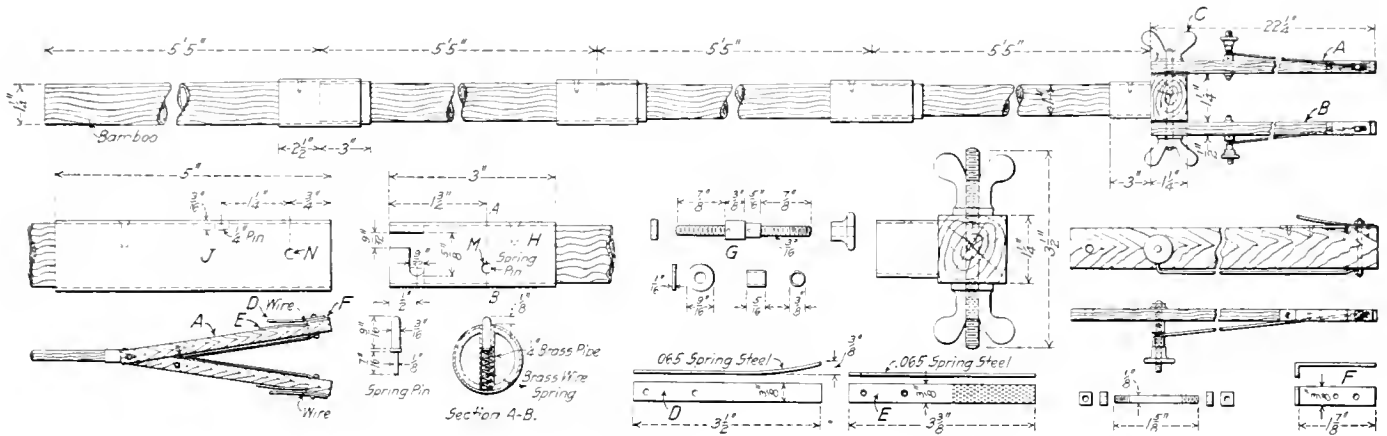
Jointed Telephone Pole for Wrecking Crews.
